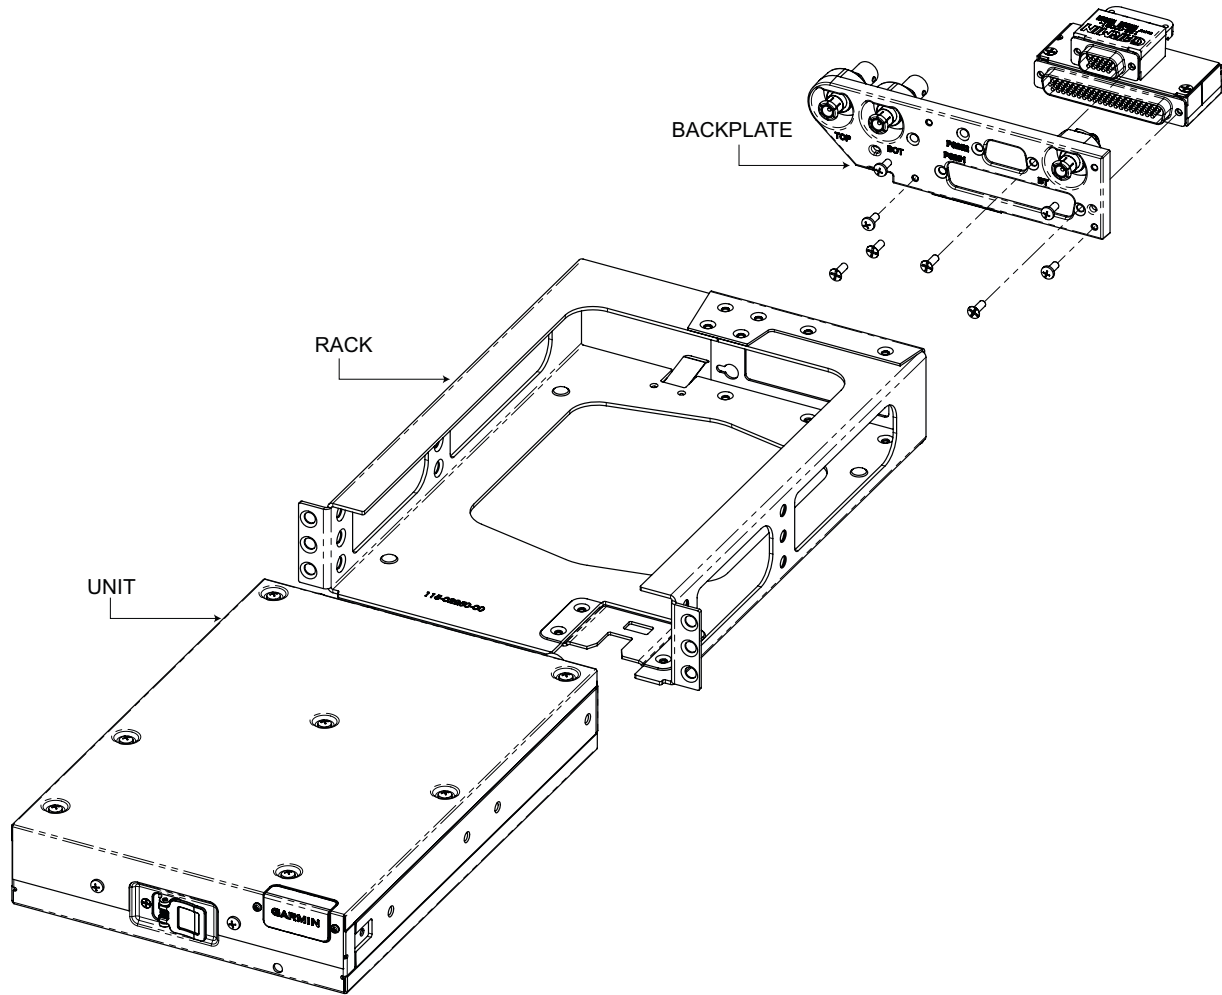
GTX 335DR/345DR G1000 Mount Rack Assembly
